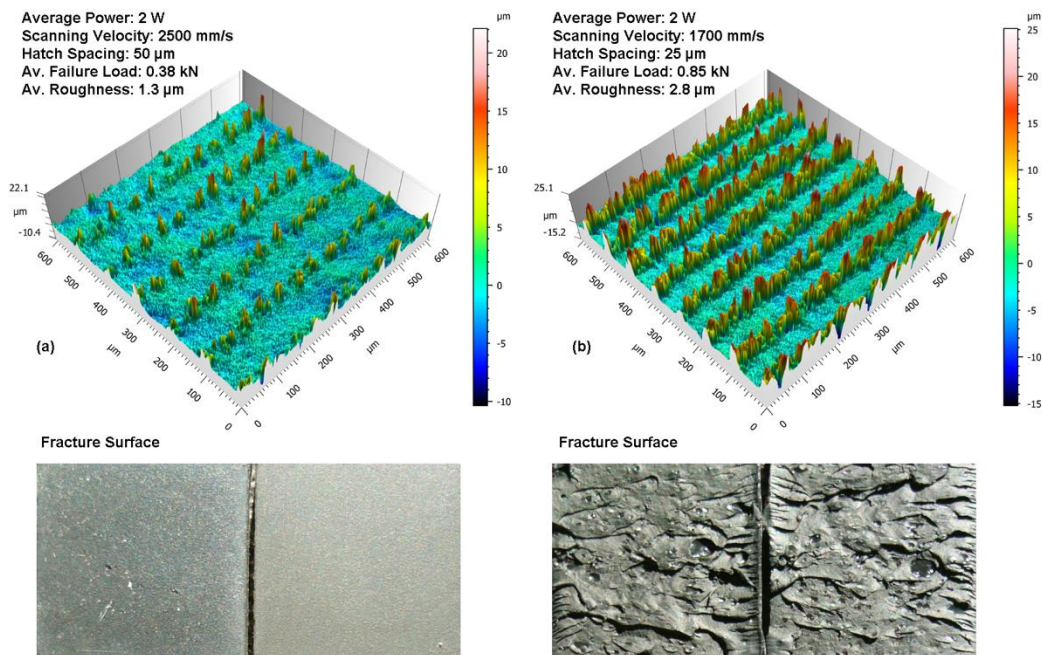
Measured topography of selected laser-treated surfaces and photographs of corresponding fracture surfaces for group 2, PL scanning strategy. Photographs show both 25 × 25 mm fracture surfaces for each individual test specimen.
